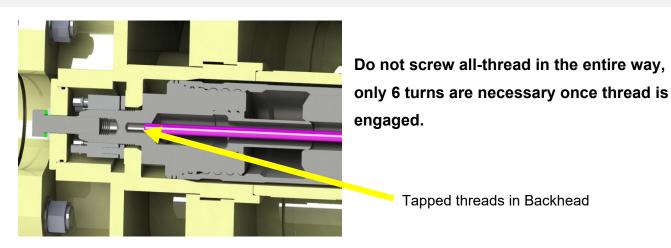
Bit Removal: All-thread installed (cutaway close up)
